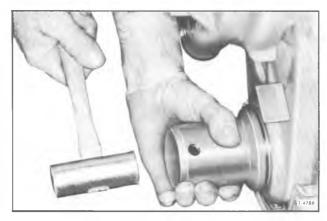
Installing Cover Oil Seal with Cover Installed (366 or 427 Engine Shown)
